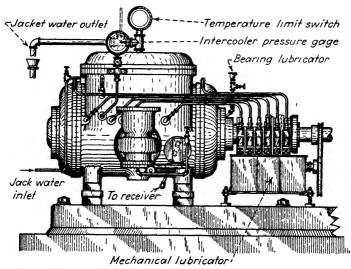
Pipe the cooling water so that the passages fill completely before any discharges. (Courtesy of Allis-Chalmers Manufacturing Co.)
